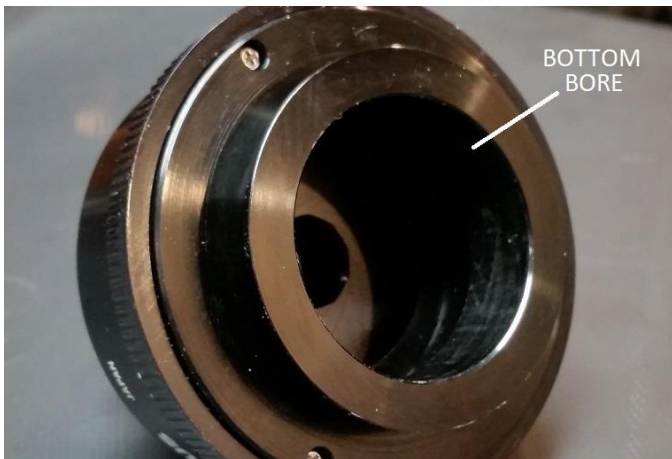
The bottom bore of the condenser (BH2-CD)
